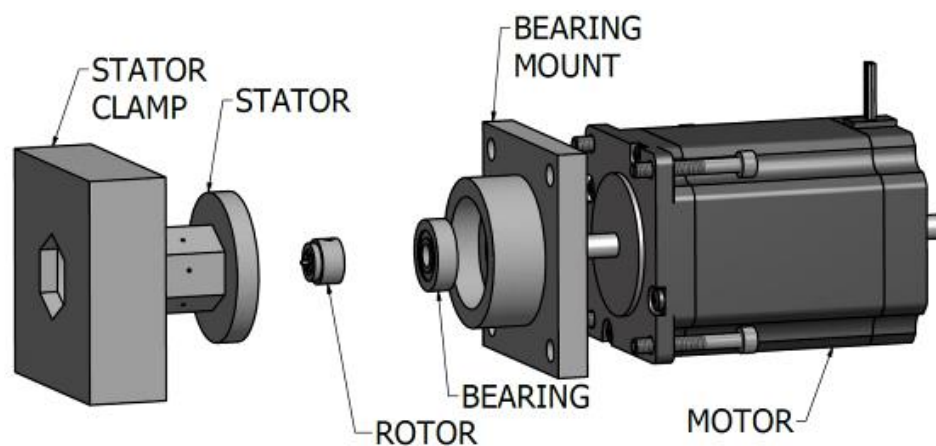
Orthogonal view of G-SIS with illustrated components. *The G-SIS was designed to act as a switching system to allow make-before-break connections or break-before-make connections using interchangeable rotors. This prototype reduces the space constraints required with the autoloader and, with modifications, allow an arbitrarily large volume to be loaded into the microfluidic device. The details on the parts are contained in the appendices.
